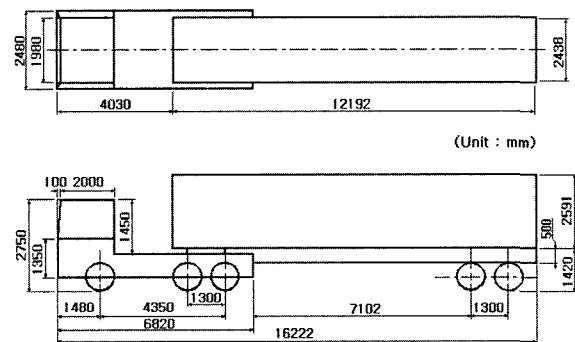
2-Dimensional view of the model tractor-trailer and its dimension.
